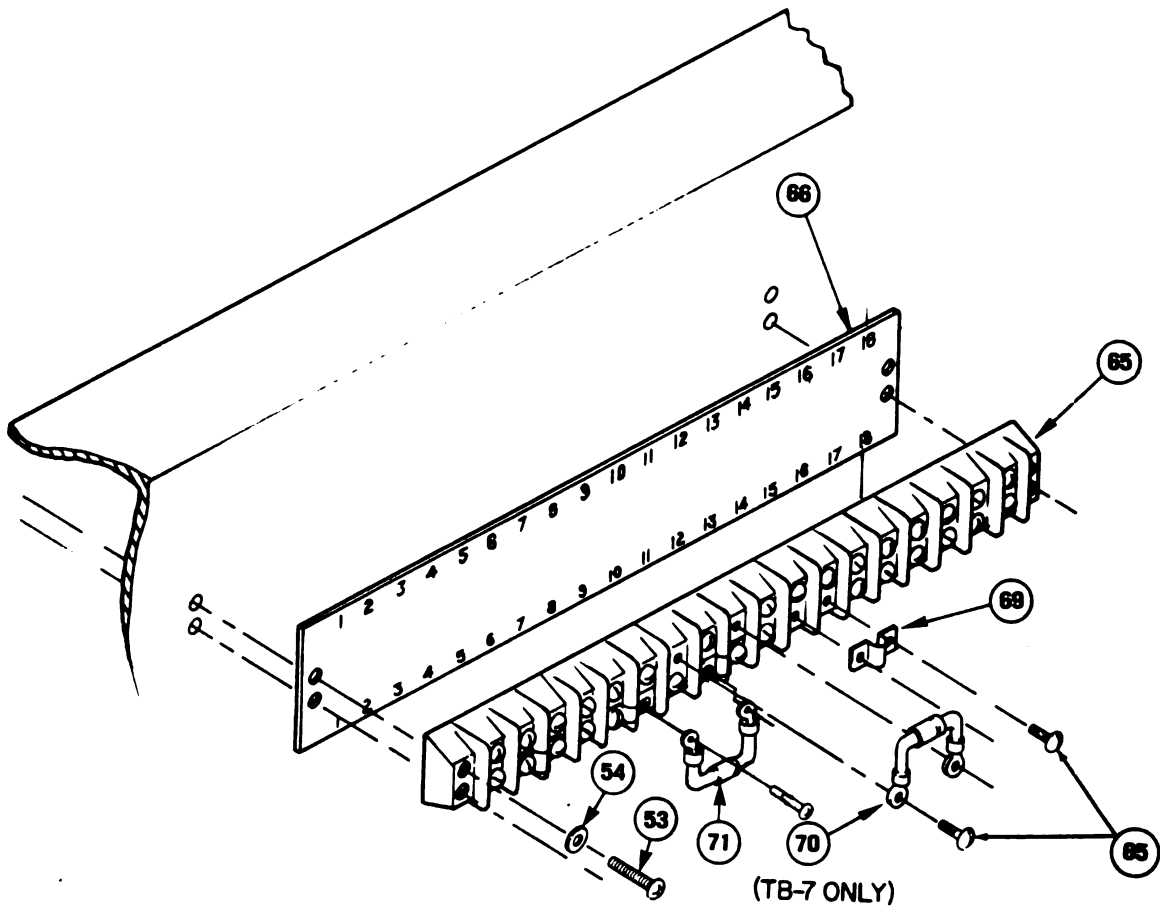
, WIRING HARNESSSES AND CABLES(SHEET 8 OF 10)
